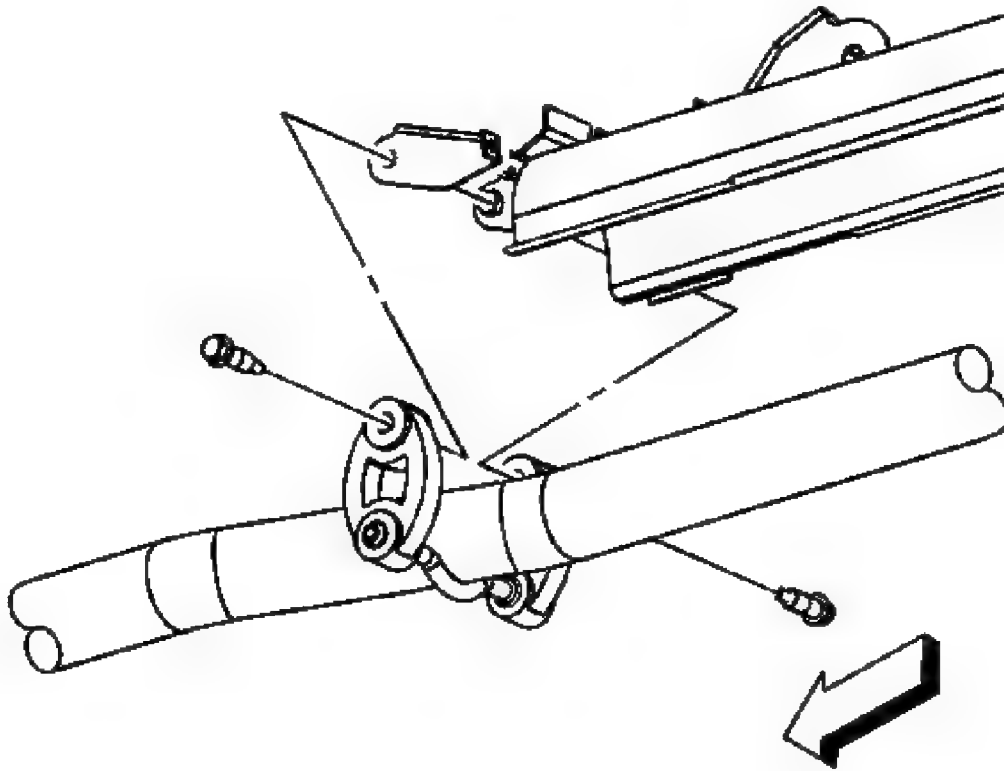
View Of Exhaust Hanger Bracket Bolts
